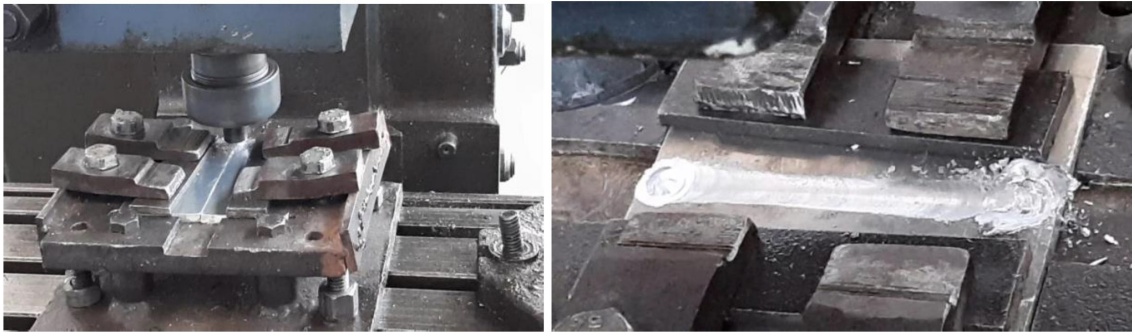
Photograph showing typical FSW experimental set up and friction stir welded plate.
